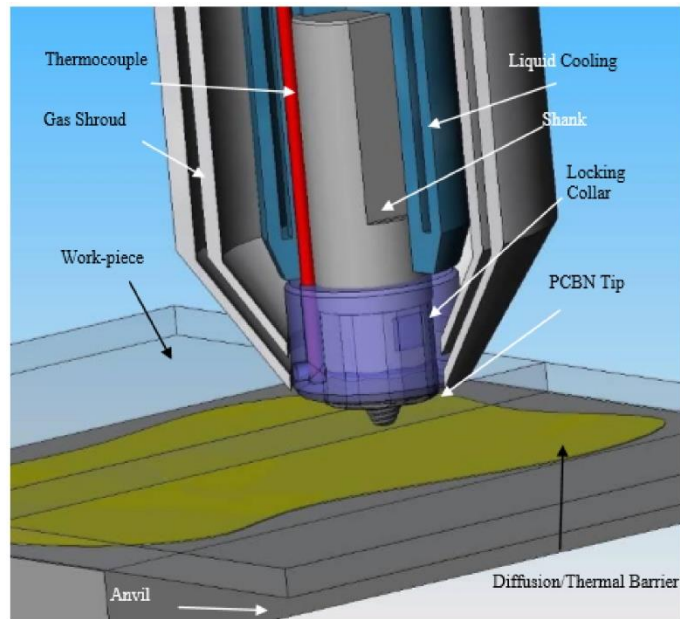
Schematic of a tool system depicting FSW tool, liquid-cooled tool holder and a telemetry system
